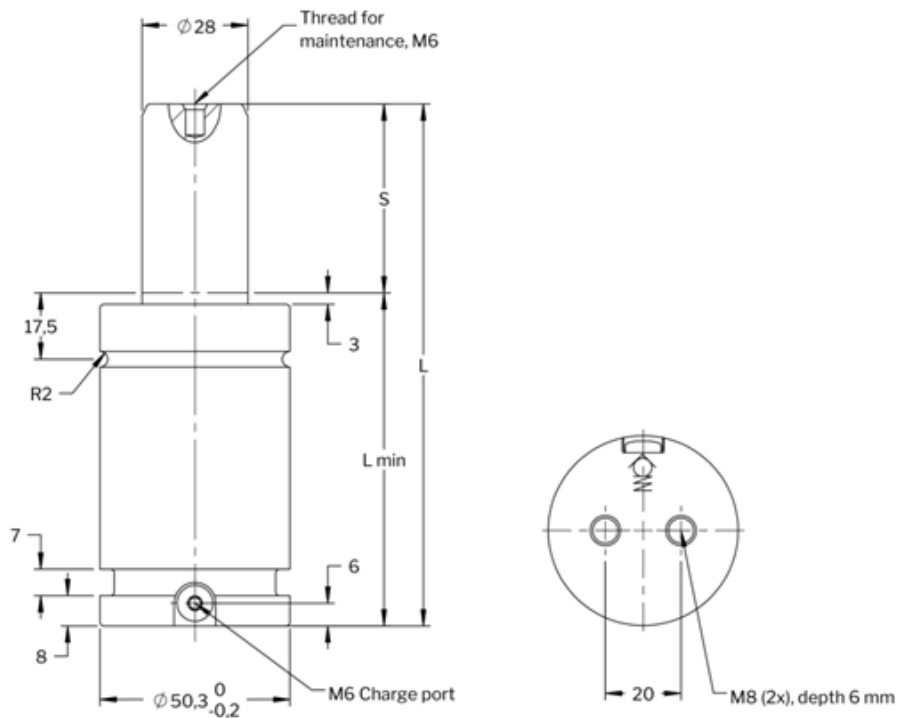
Kaller X 100-019 gas spring. L – 76 mm; L min – 57 mm; S – 19 mm [35]
